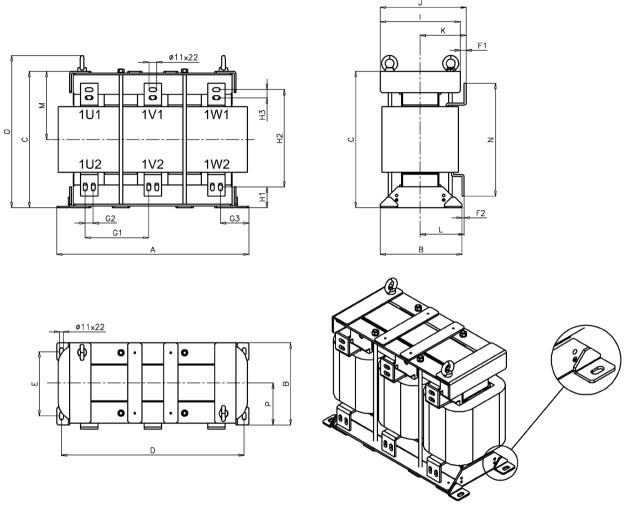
Dimension drawing of line reactor 6SL3000-0EE41-4AA0
